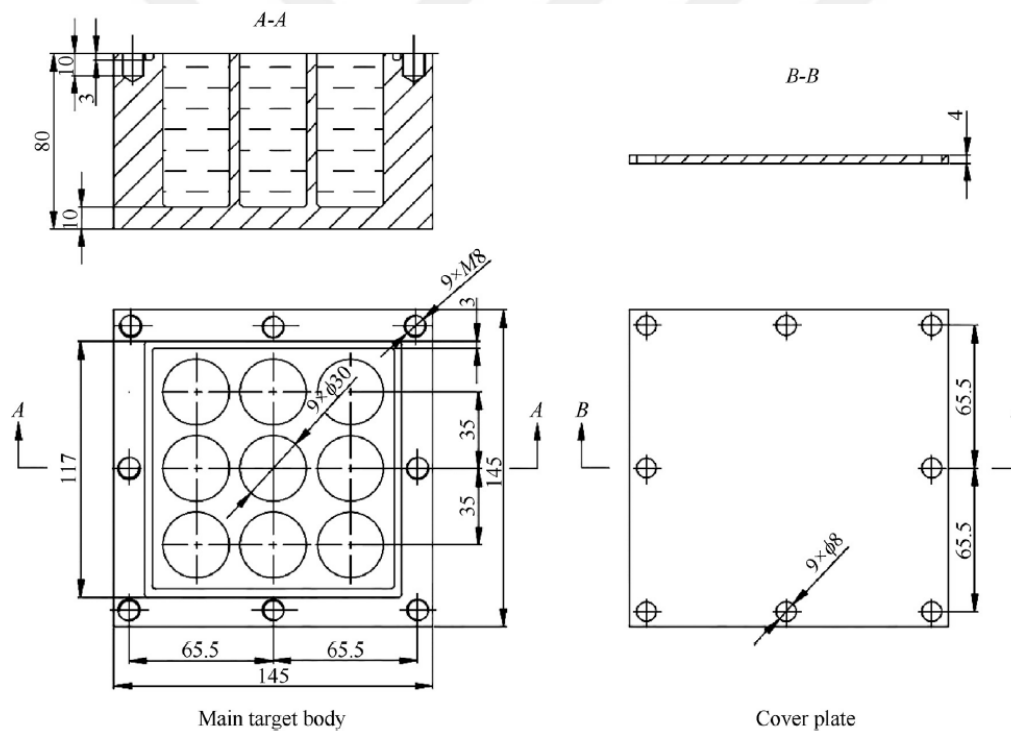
The Design of the Liquid-Filled Structure Armor [28]
